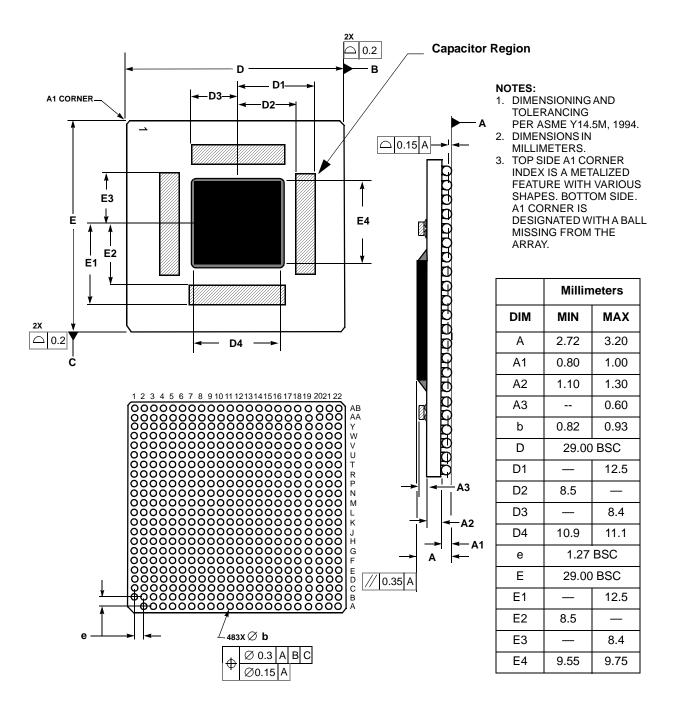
Mechanical Dimensions and Bottom Surface Nomenclature for the MPC7457, 483 CBGA Package
